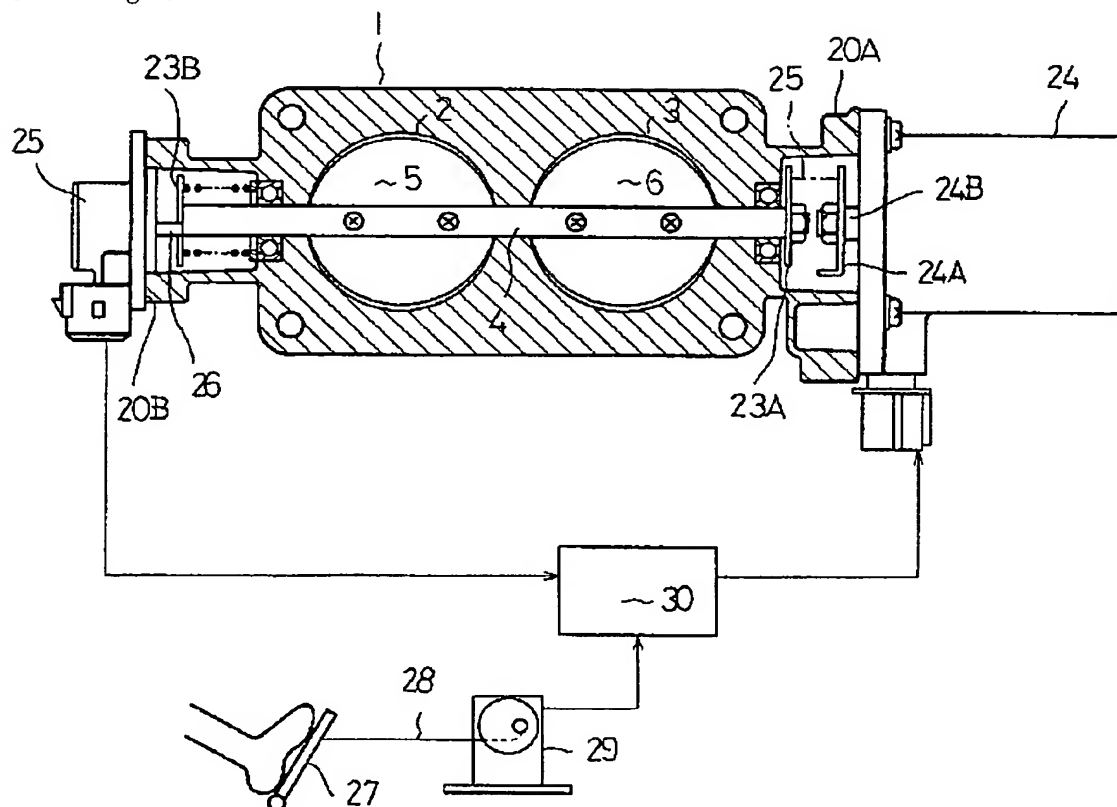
Important section drawing of longitudinal section showing the inspired-air-volume control unit in the conventional internal combustion engine.
